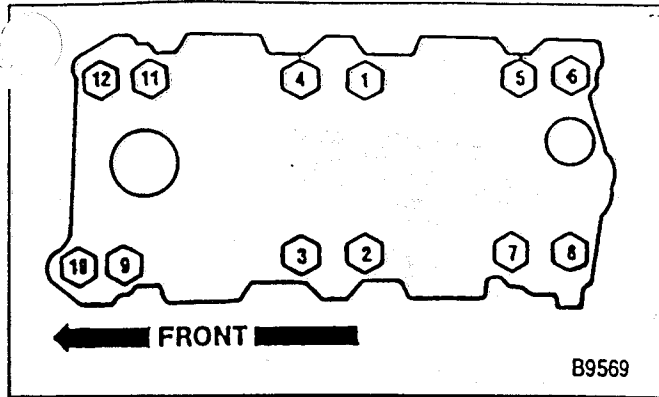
Intake Manifold Bolt Tightening Sequence (5.0L and 5.7L Engines)
